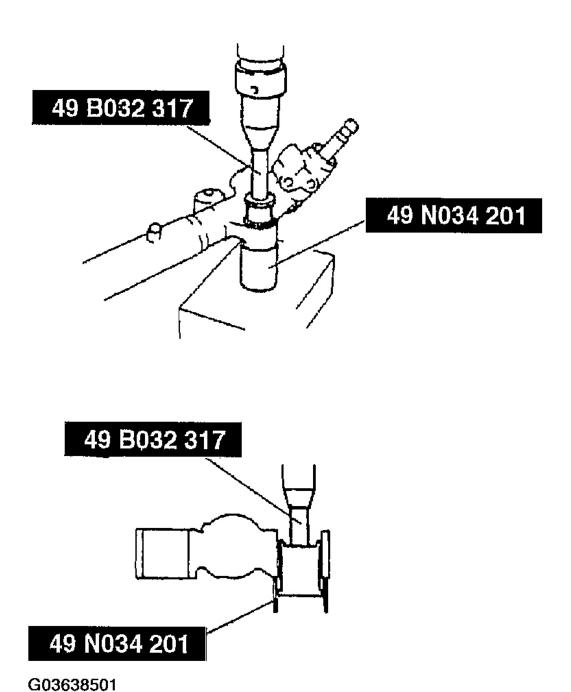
Pressing Out Mounting Rubber Courtesy of MAZDA MOTORS CORP.
